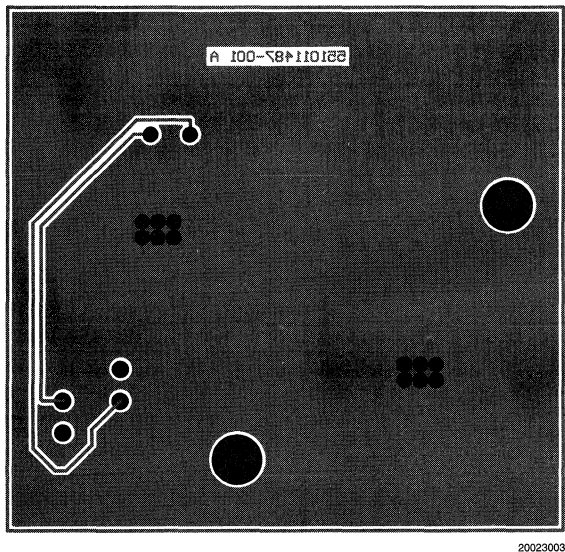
LM2698 Demoboard Bottom Layer Layout
